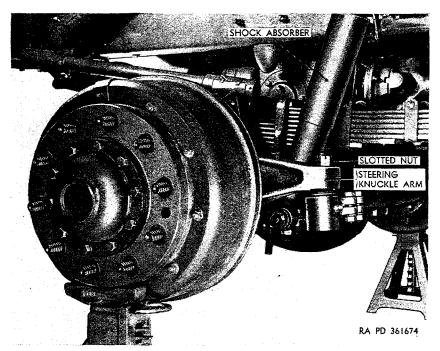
Left end of front axlc assembly with wheel and tire removed.
